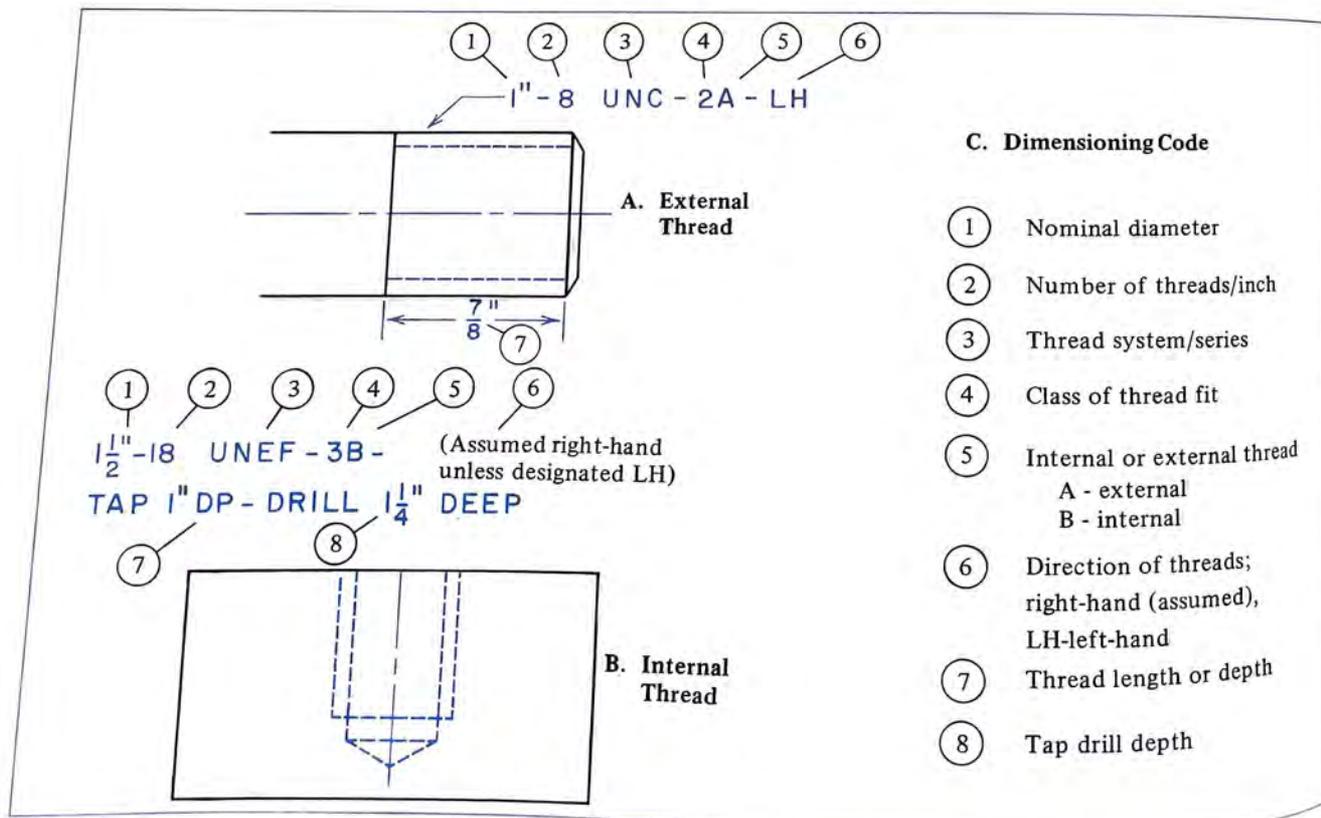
Simplified Drawings of Threads, with Dimensions and Dimensioning Codes
